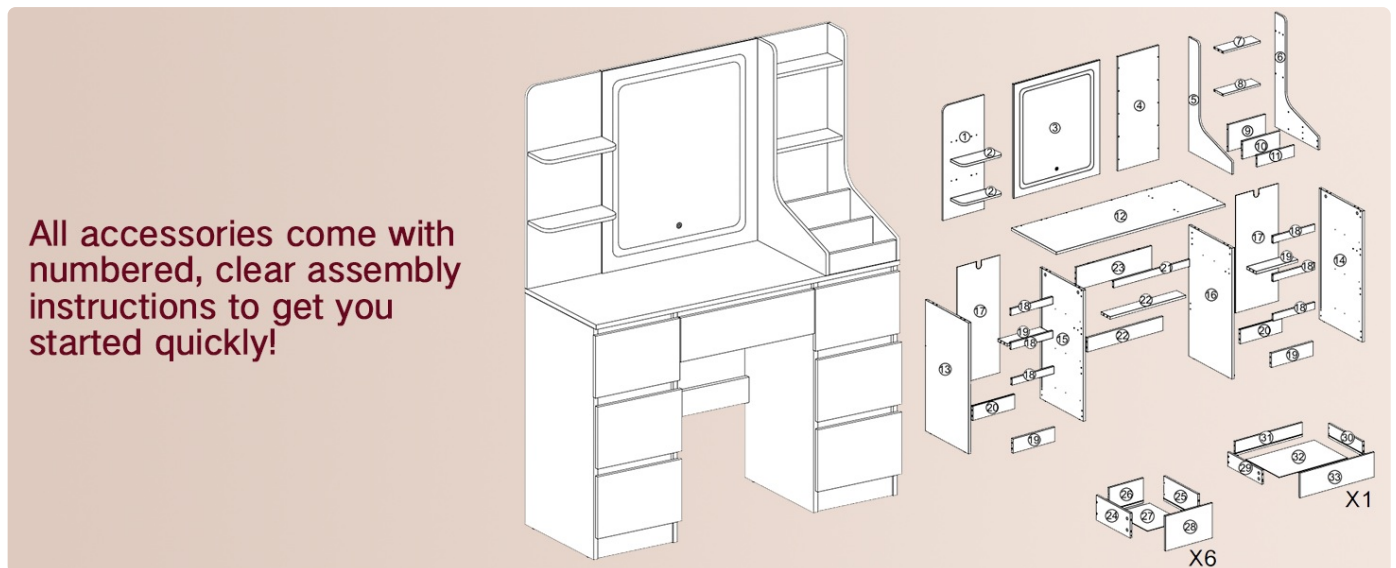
Exploded view of the dressing table components, illustrating the assembly process with numbered parts.
